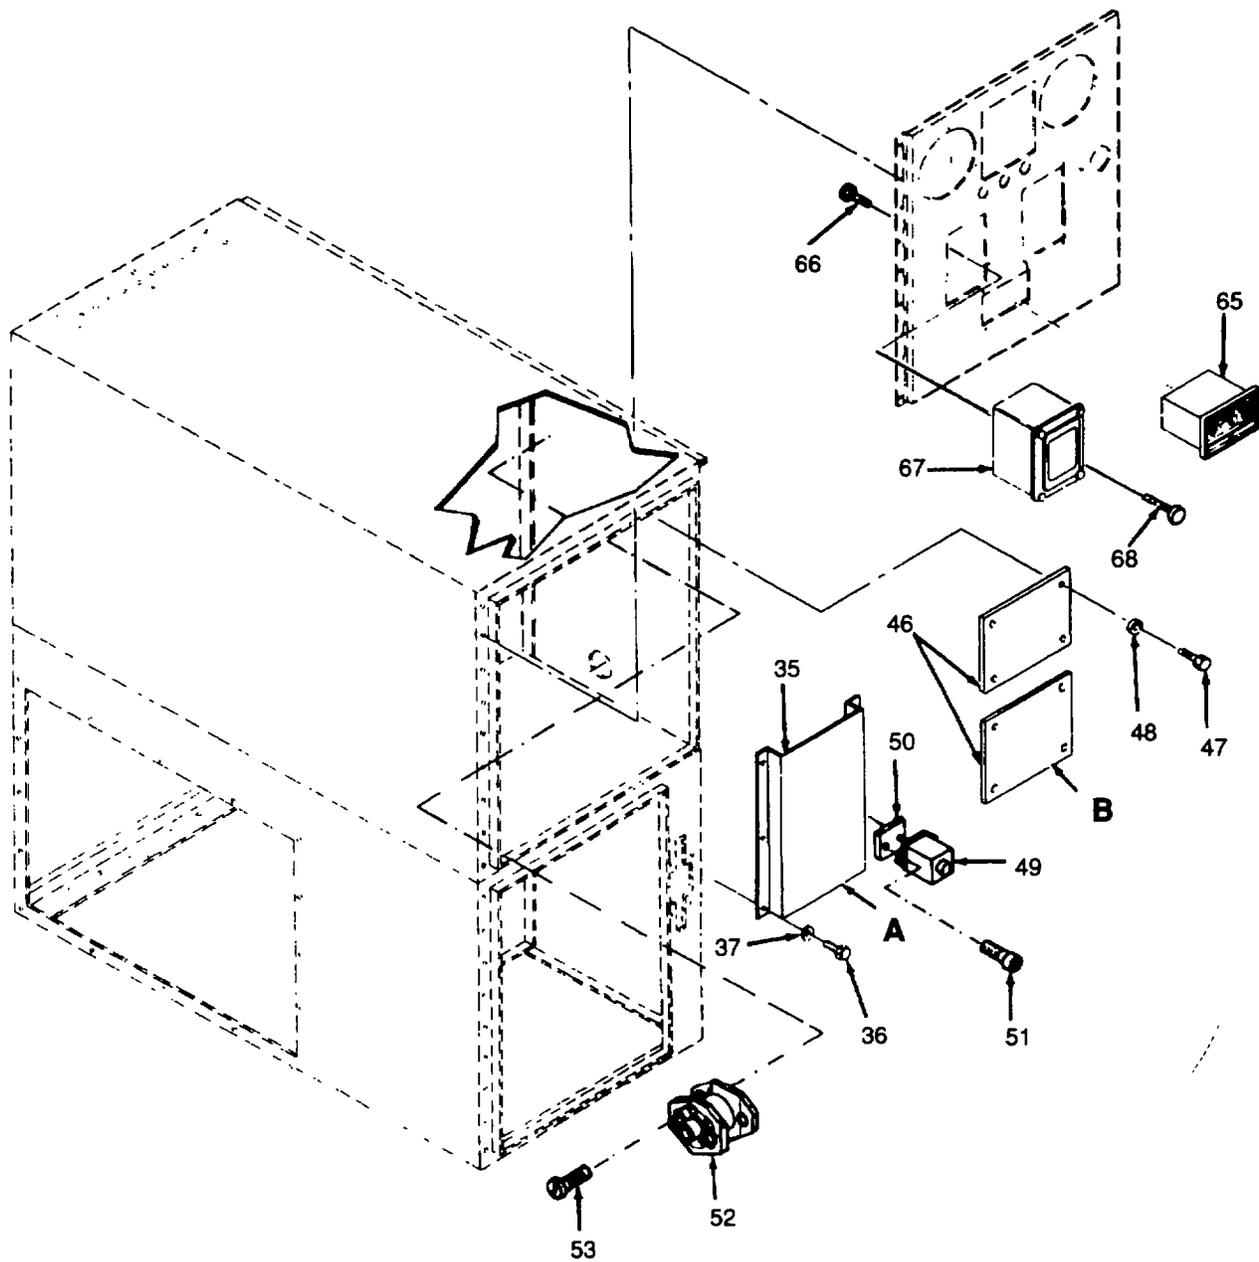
AC Electrical Components and Related Parts (Sheet 2 of 5)
